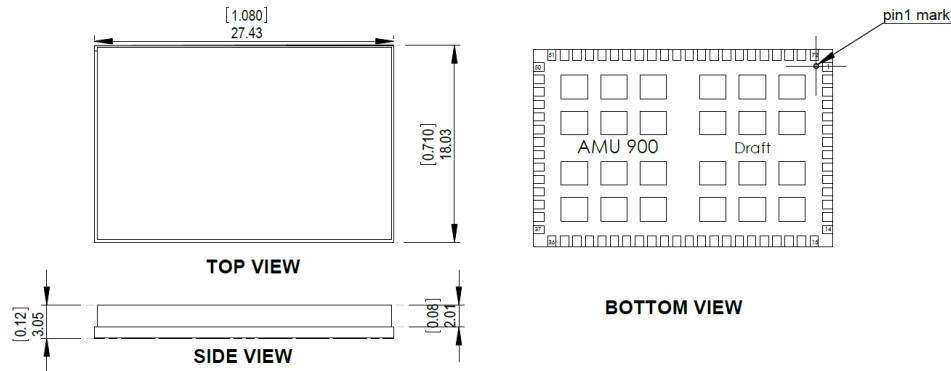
MLink Ultra Mechanical Drawing
